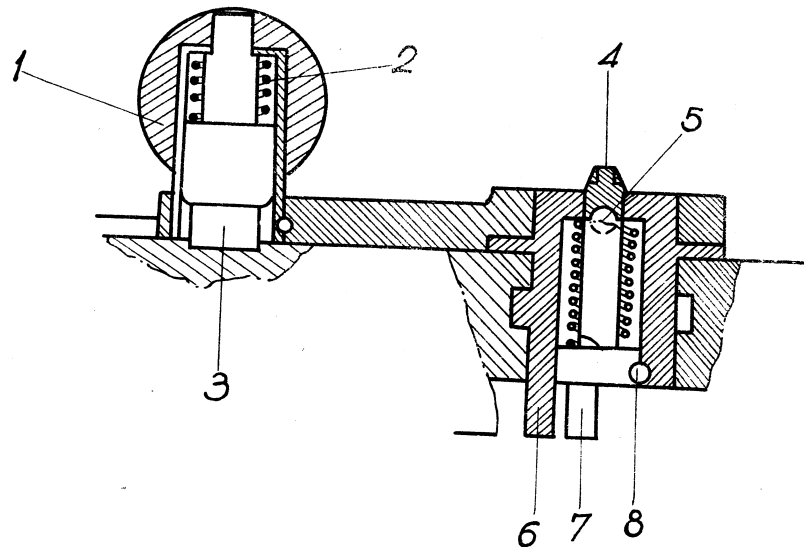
RECOCKING HANDLE ASSEMBLY
